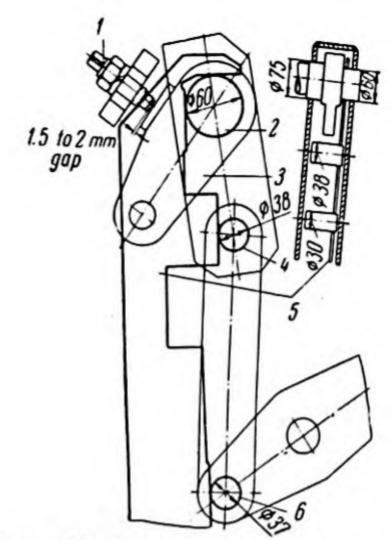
Checking of MKII-110 circuit-breaker actuating linkage:
